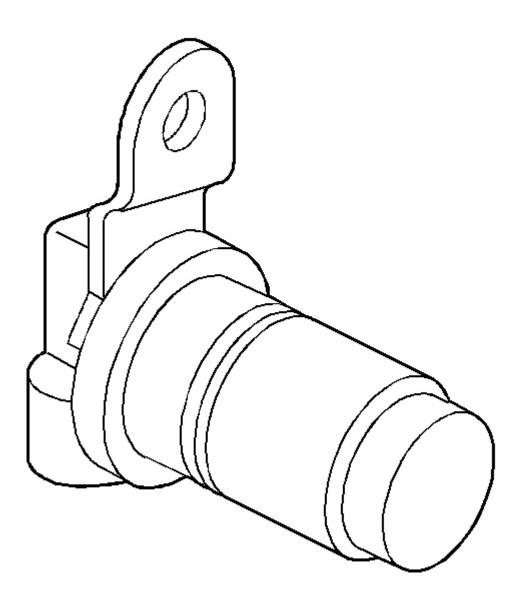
Vehicle Speed Sensor Assembly (M30/M32) Courtesy of GENERAL MOTORS CORP.
